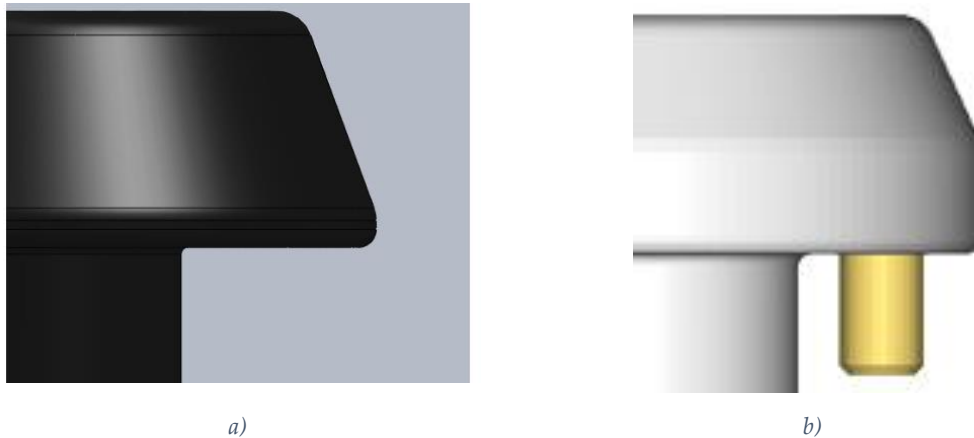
composite wheel inserts: a) proposed version and b) final version with GFRP dowel pin
